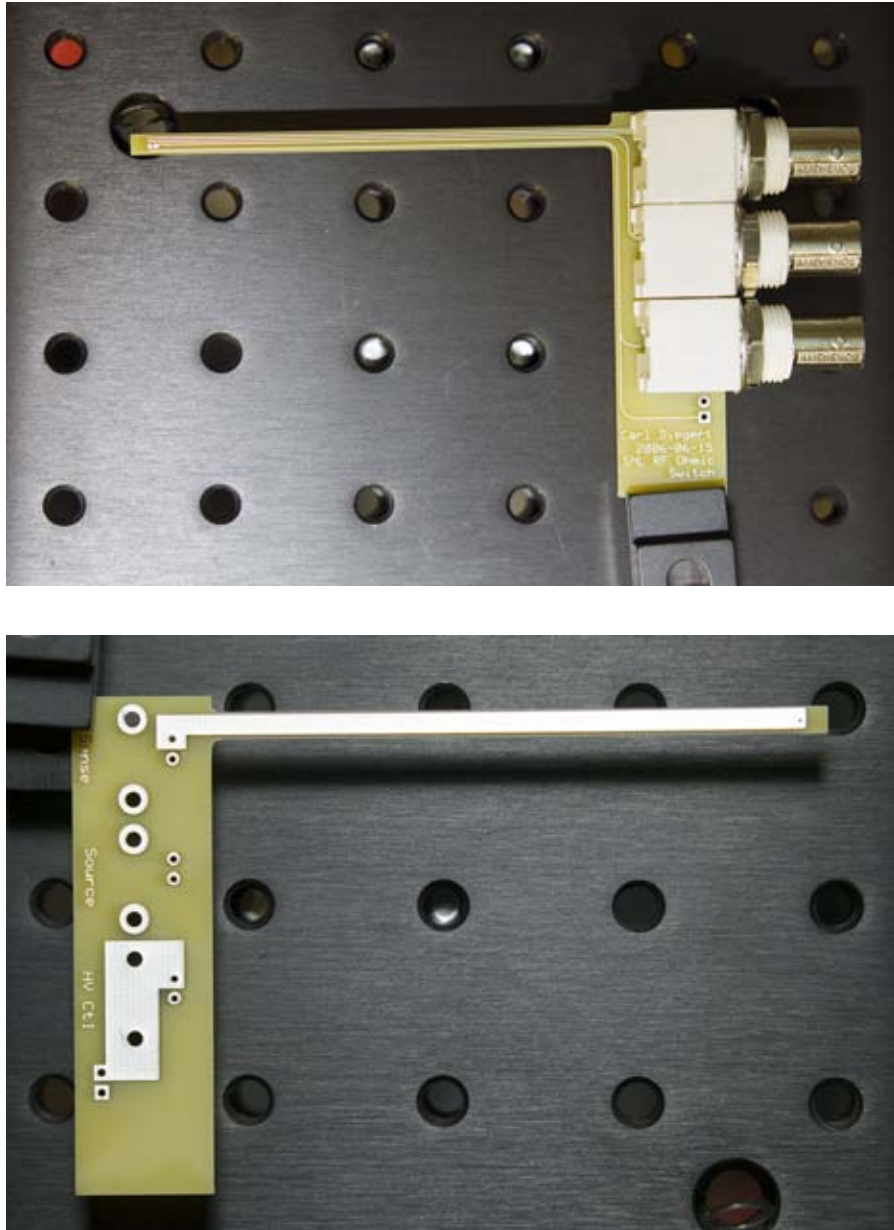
Circuit board fixture to operate switch during imaging on X-ray machine.
